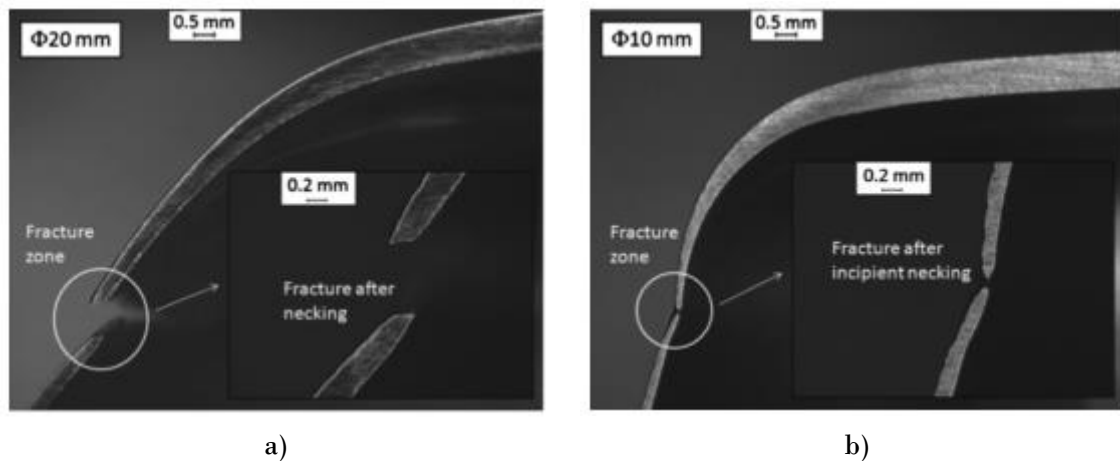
Fractography at the fracture initiation zone for SPIF tests using 20 mm tool diameter (a) and 10 mm tool diameter (b) (Centeno et al., 2014).
